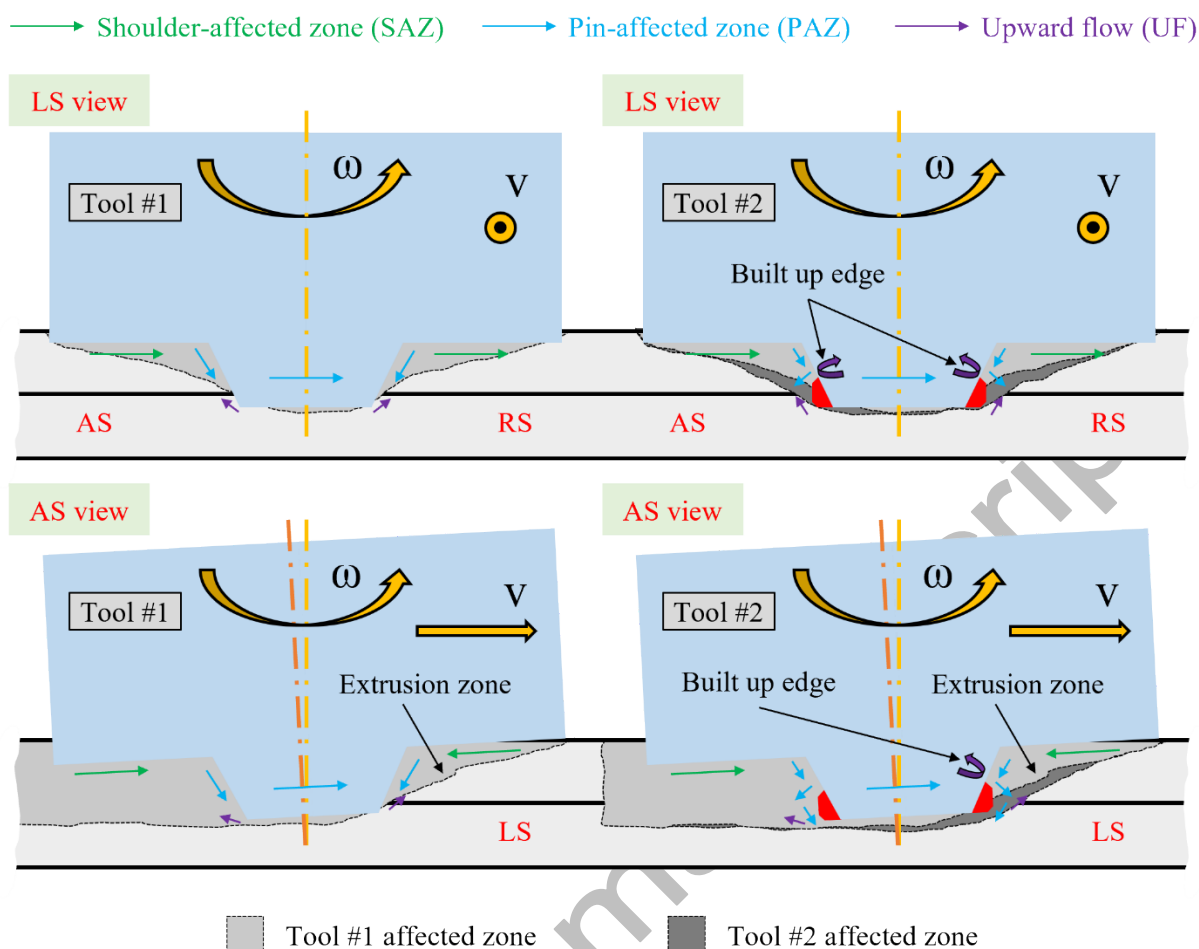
Schematic of the different material flows with Tool #1 and Tool #2: view plane perpendicular to the welding direction (from the LS point of view) and view plane parallel to the welding direction (from the AS point of view). The SZ regions were drawn from the cross-section of the CP-Ti/CP-Ti joints.
